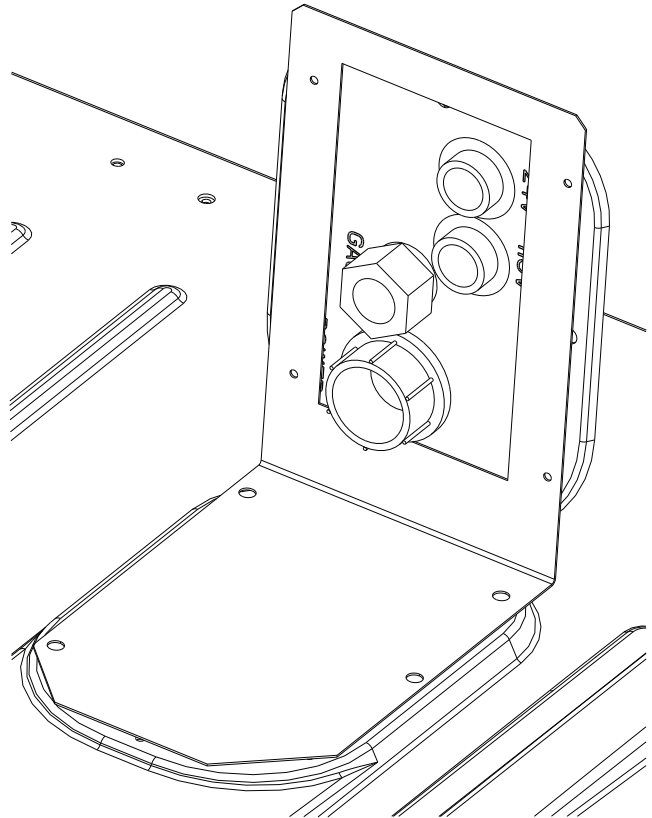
Thru-the-Base Fitting Assembly (Shown in Shipping Position)
